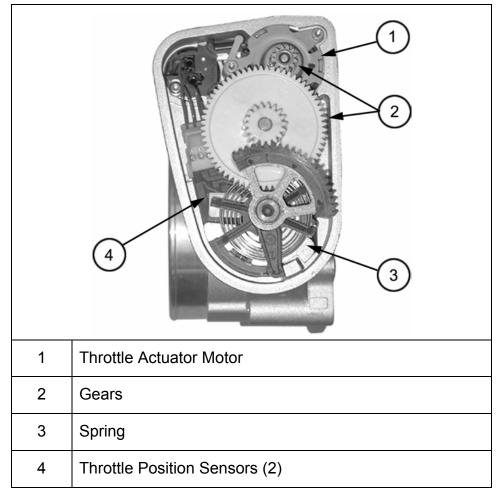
5.7L ETC Throttle Actuator Motor, TPS, Spring and Gears
